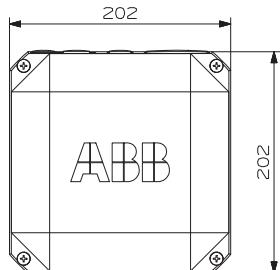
Motor sizes 100 – 160 VH and VM, standard design with 3 terminals
